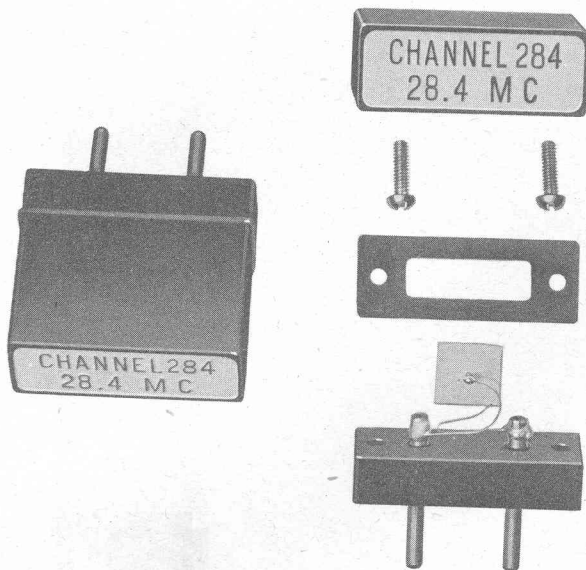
Radio Transmitter BC-684-A: Assembly and Exploded View of Crystals
